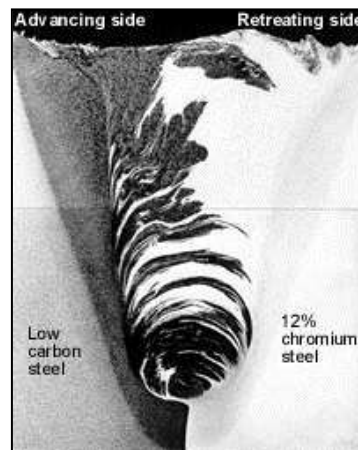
Transverse taper macrosection of dissimilar 12% chromium/low carbon steel FSW joint showing cyclic flow pattern^[15]
